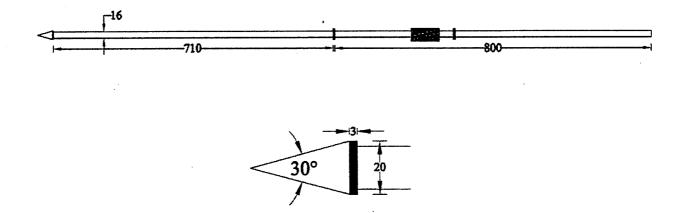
, Dynamic cone penetrometer (dimensions in millimeter).
